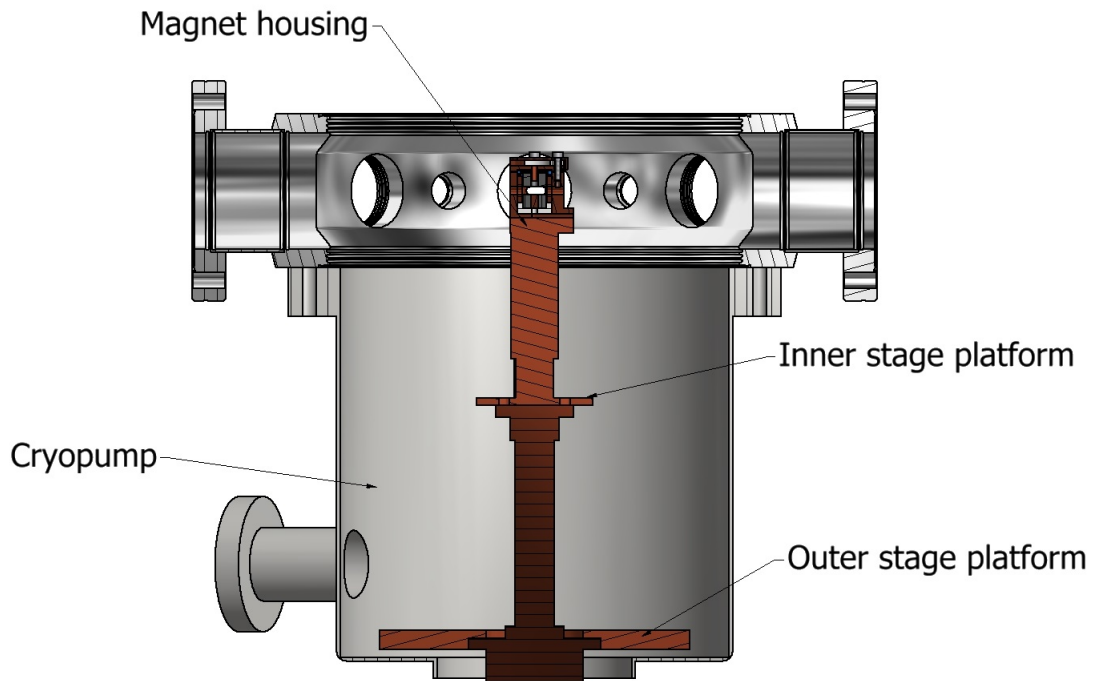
Cross-section view of magnetic trap housing mounted on the cryostat.
